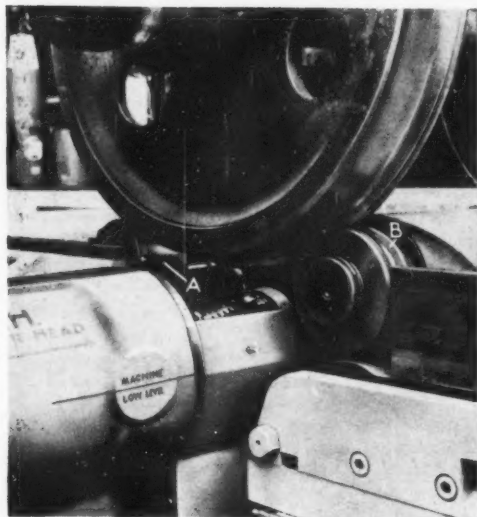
Close-up View Showing the Right-hand Cutter Head, and the Support and Driving Rolls for the Wheel
